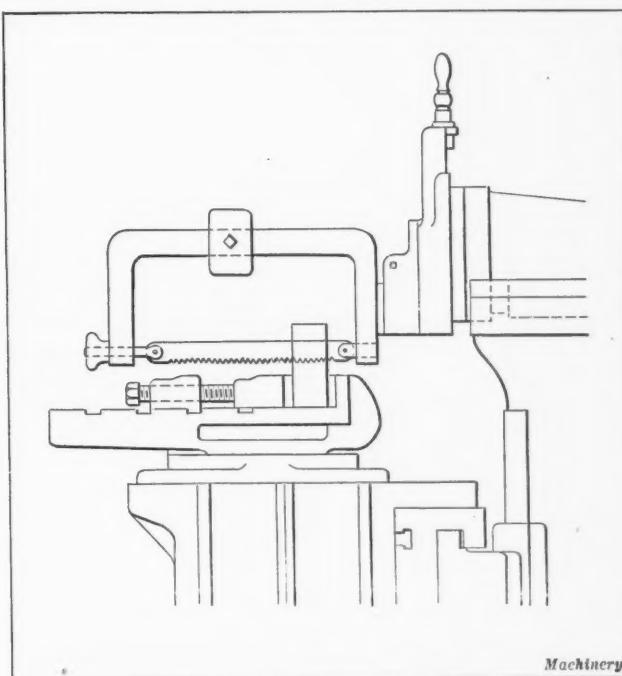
Shaper equipped for Use as a Power Hacksaw Machine
